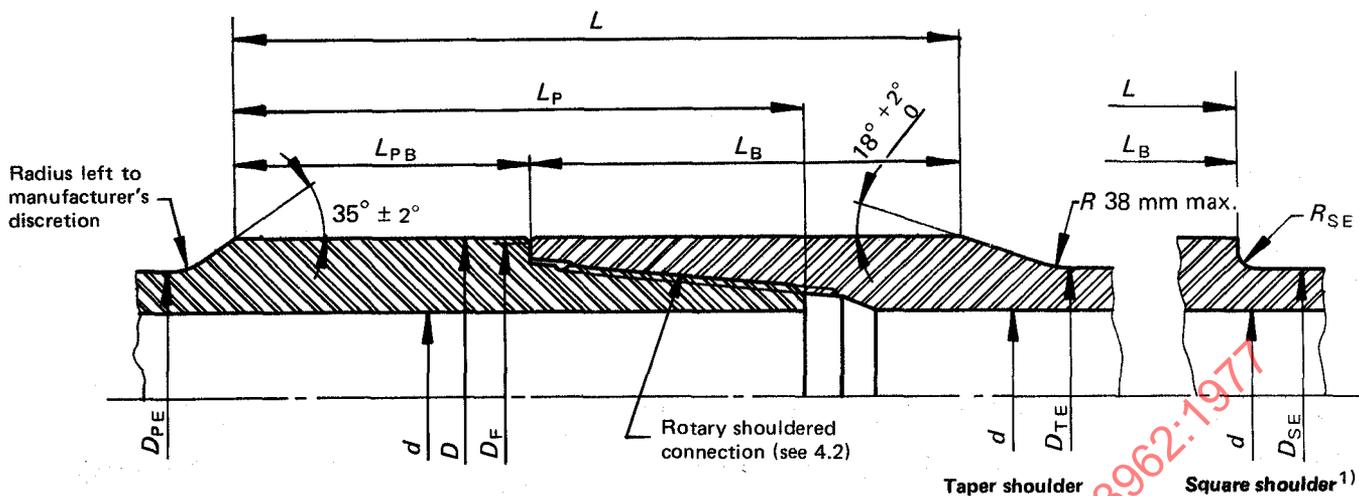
Tool joint — Taper shoulder and square shoulder (see table 1)
